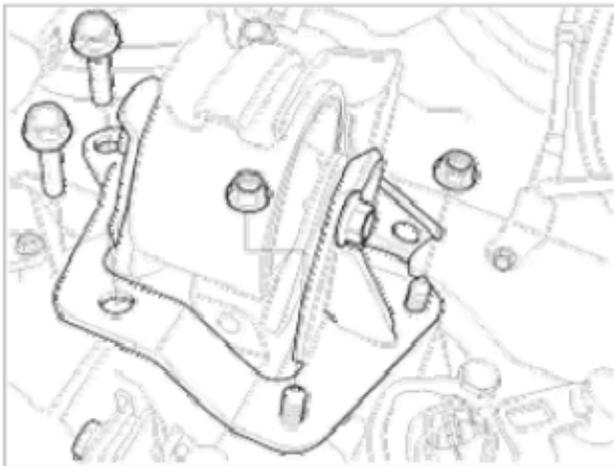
Identifying Transaxle Mounting Bracket, Bolts And Nuts
